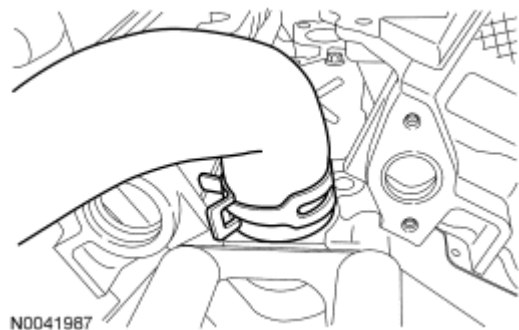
Locating Coolant Pump Hose From Cylinder Block Outlet
